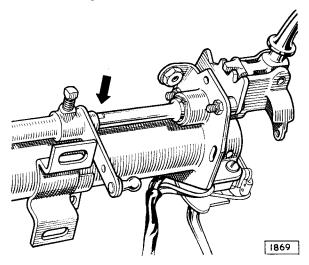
Align the flat on the end of the upper control shaft with the securing screw on the control lever.
